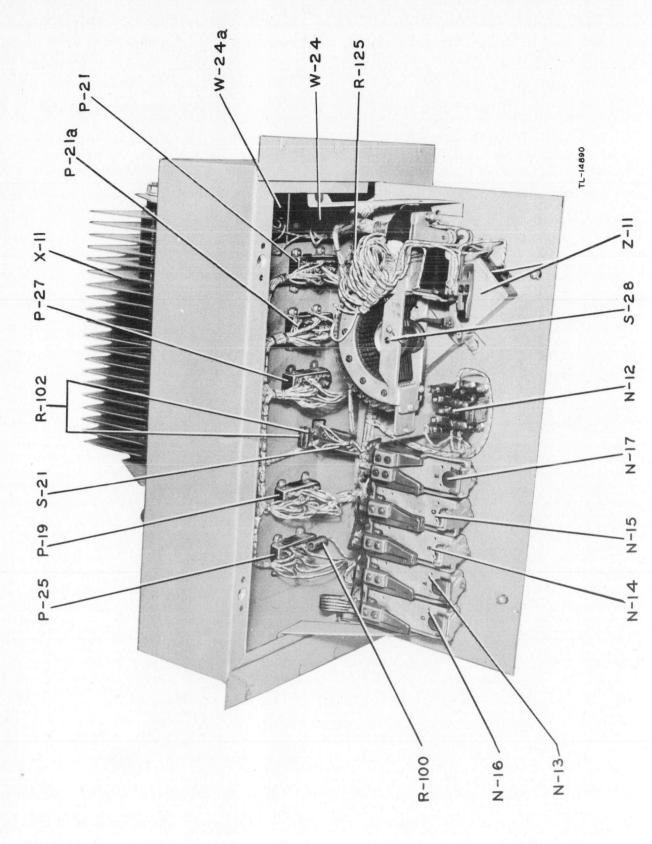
REMOTE CONTROL unit, top front view, panel open.
